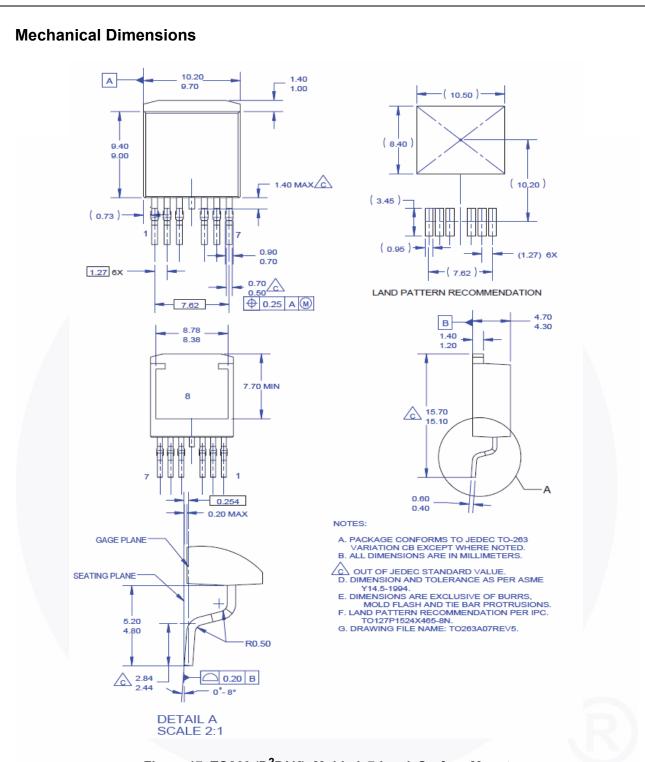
TO263 (D²PAK), Molded, 7-Lead, Surface Mount
